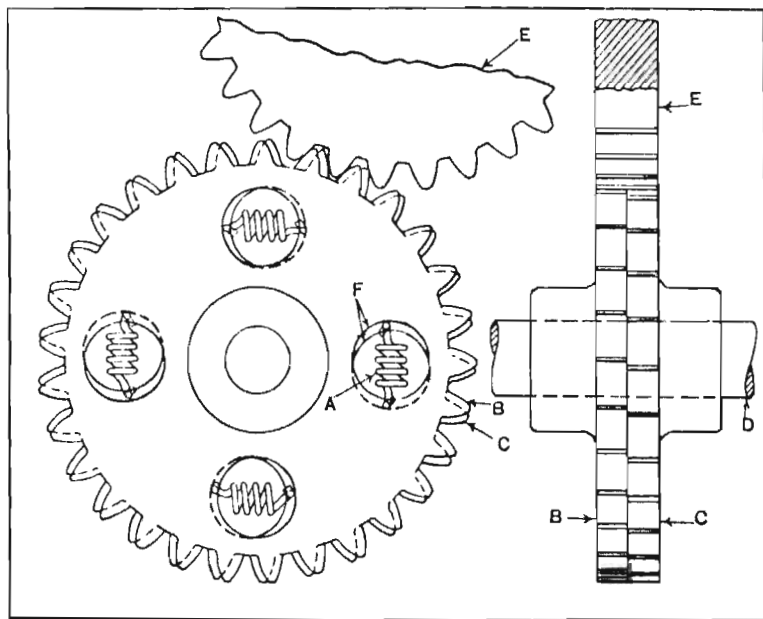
Device for Eliminating Lost Motion in Gear Teeth
